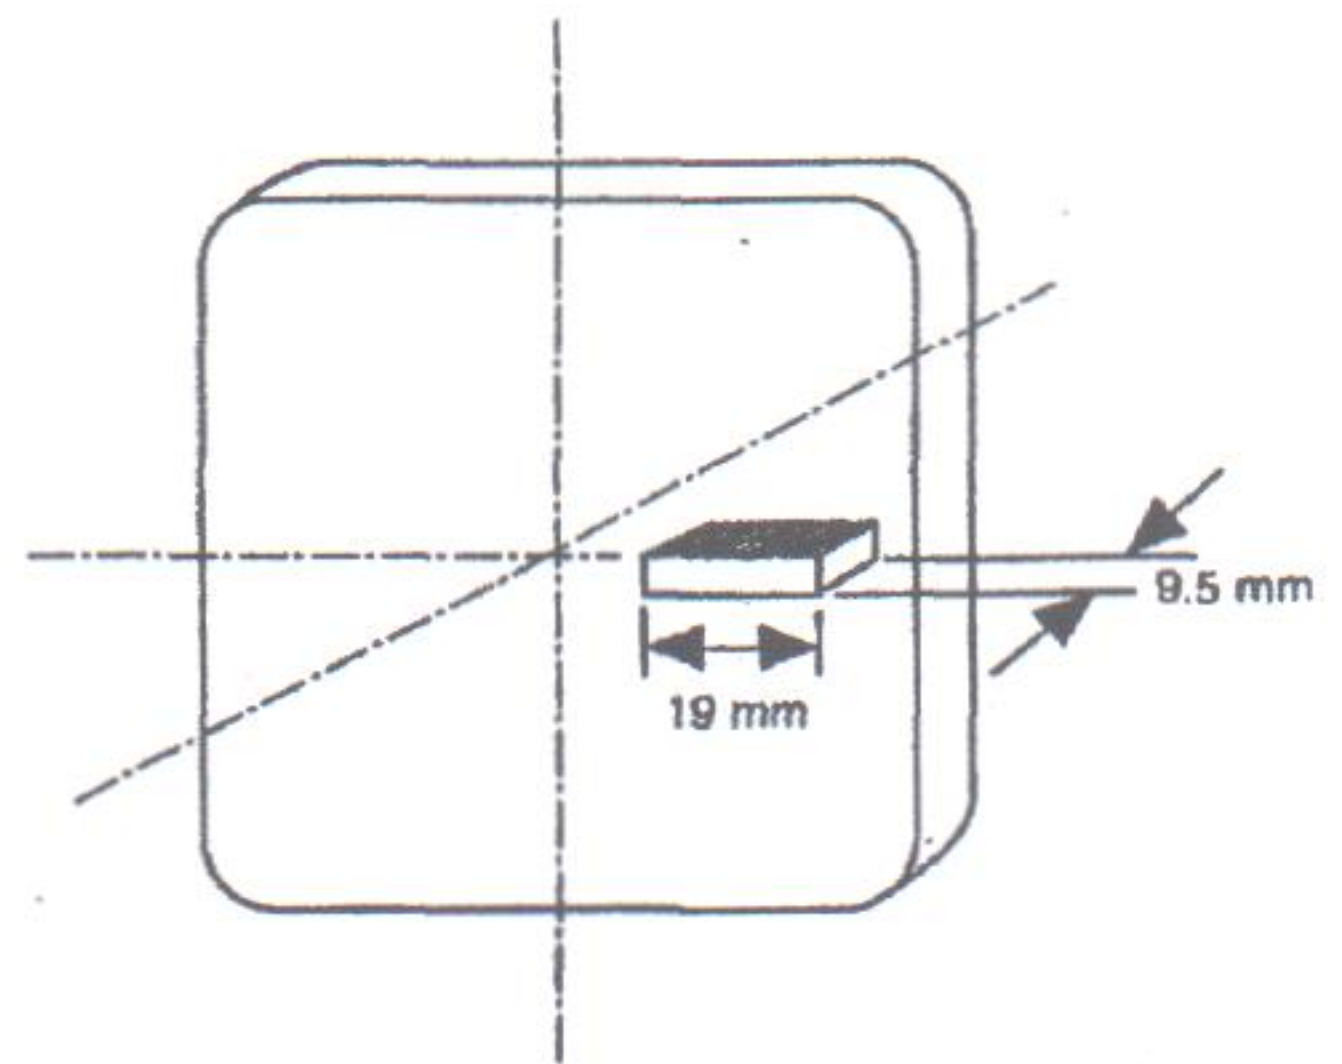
Specimen from Large Bar or Billet for Microscopical Test
